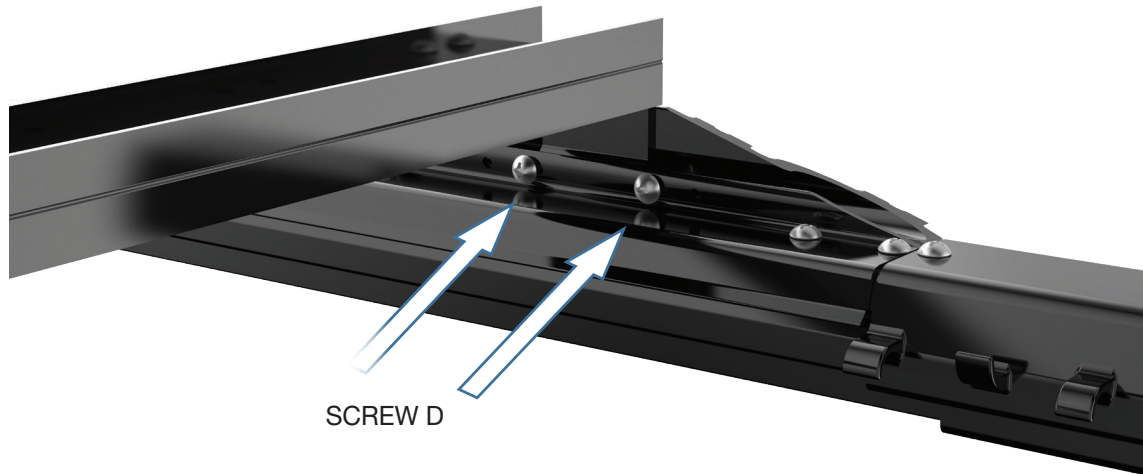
SECURE FIXTURE FROM SLIDING MOVEMENT BY TIGHTENING THE CONTAINMENT SCREWS
